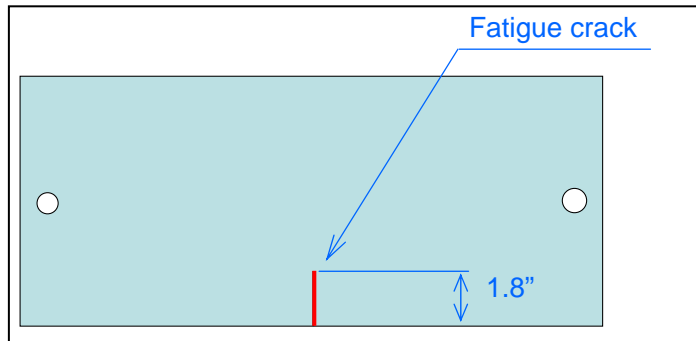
Fatigue Crack actually Fabricated by Tension Test Apparatus
